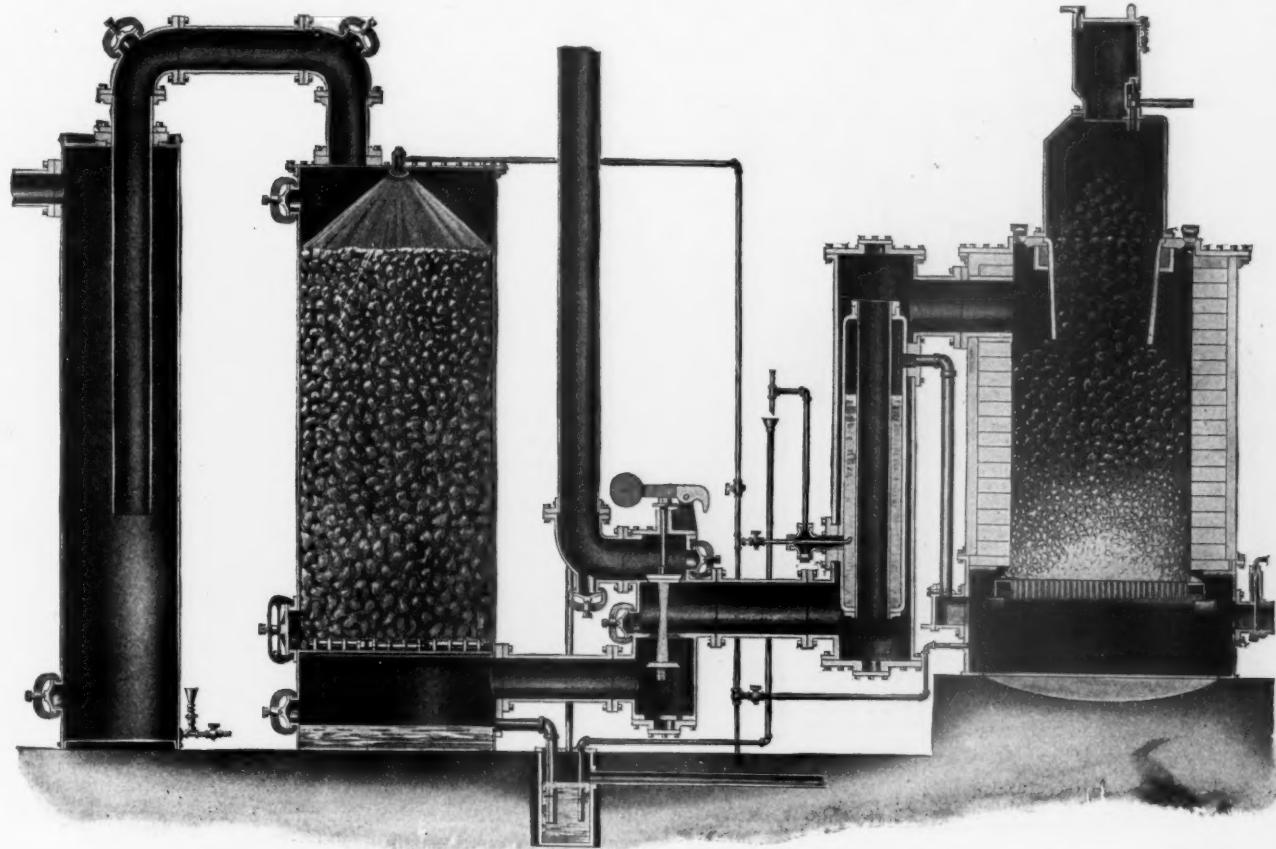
SECTIONAL VIEW OF FAIRBANKS-MORSE SUCTION GAS PRODUCER.
